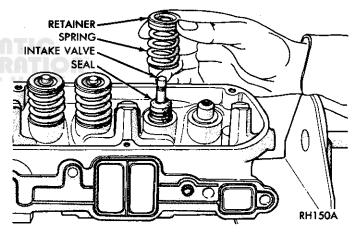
Installing Valve, Cup Seal, Spring and Retainer
